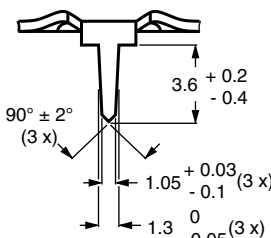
Mounting hole diagram and outline. Form MR: With mounting ring and pins
